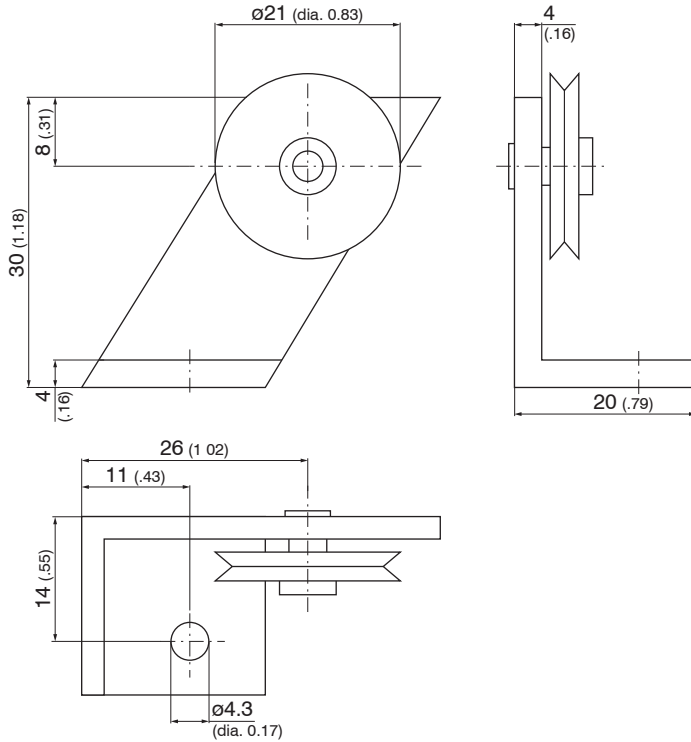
Guide pulley TR3-WPS fix with mounting socket, dimensions in mm (inches), not to scale
